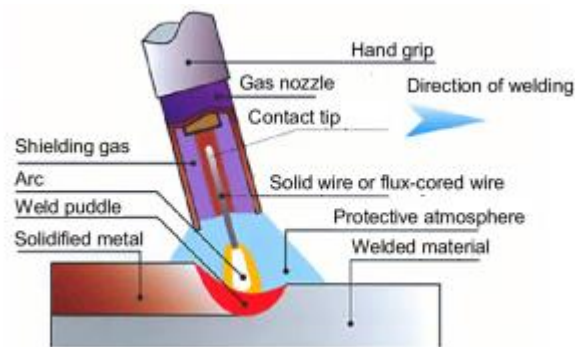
Schematic diagram of MIG welding [10]
